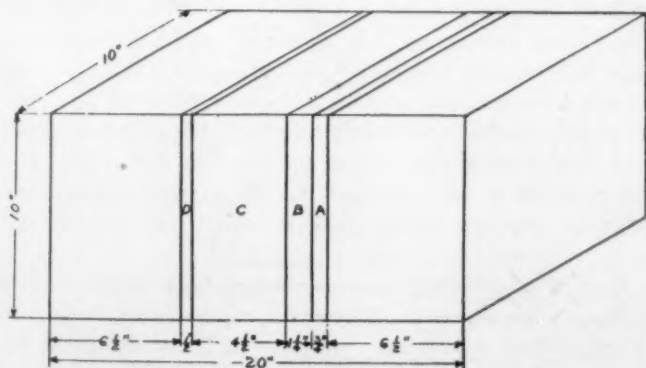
LINE SKETCH OF TEST CASTING SHOWING POSITIONS OF SECTIONS FROM WHICH TEST SPECIMENS WERE REMOVED
